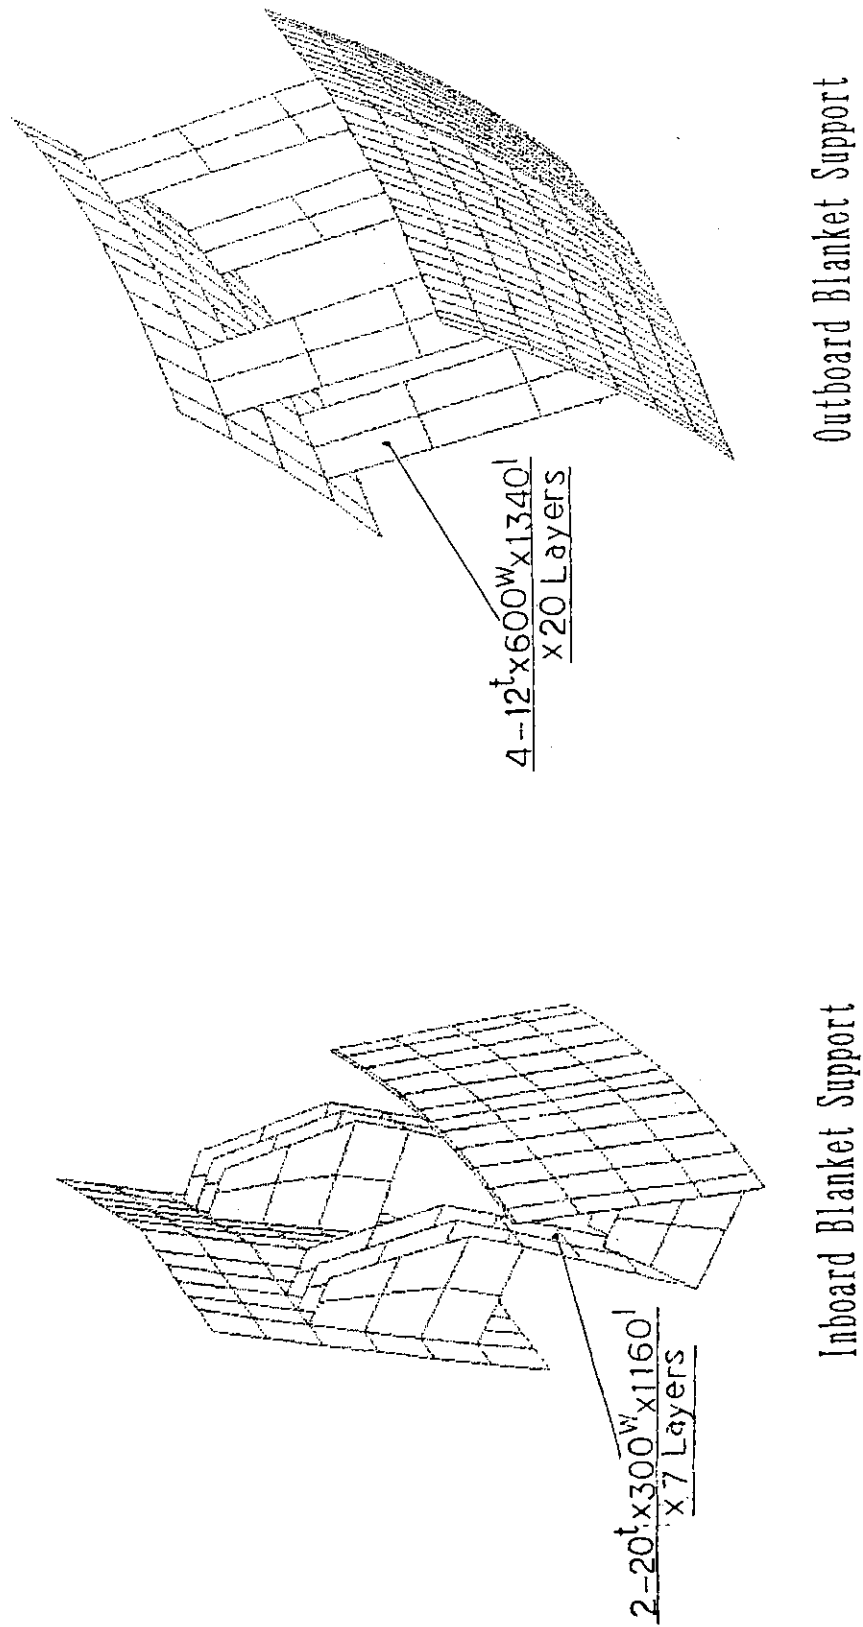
3 Details of Inboard and Outboard Blanket Support Structure Models, with Multi Layered Flexible Plates
